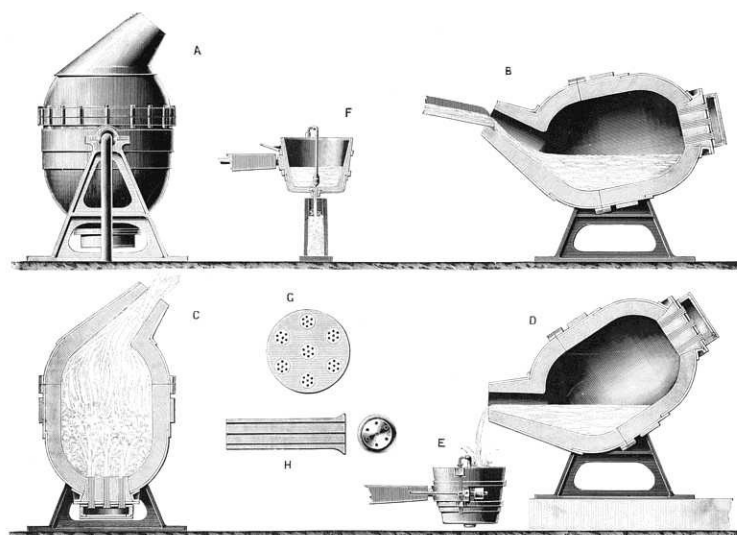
THE FIRST FORM OF BESSEMER MOVEABLE CONVERTER AND LADLE
